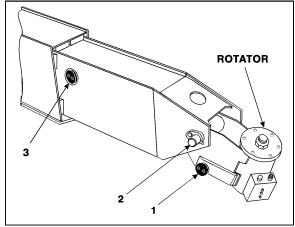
Location of Components - Rotator and Leveling Cylinder
